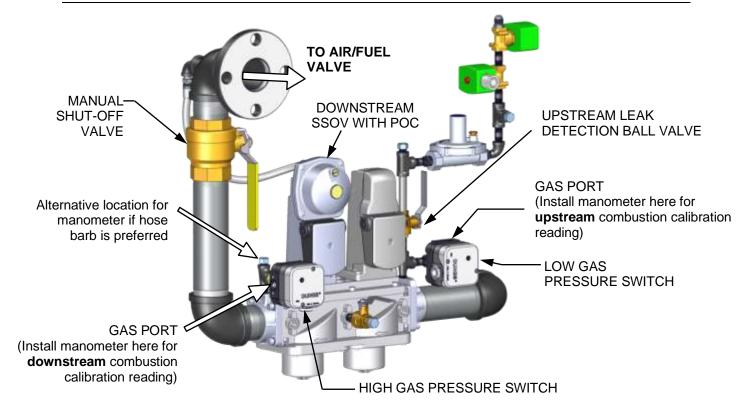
Port Location for Combustion Calibration – BMK5000-6000
